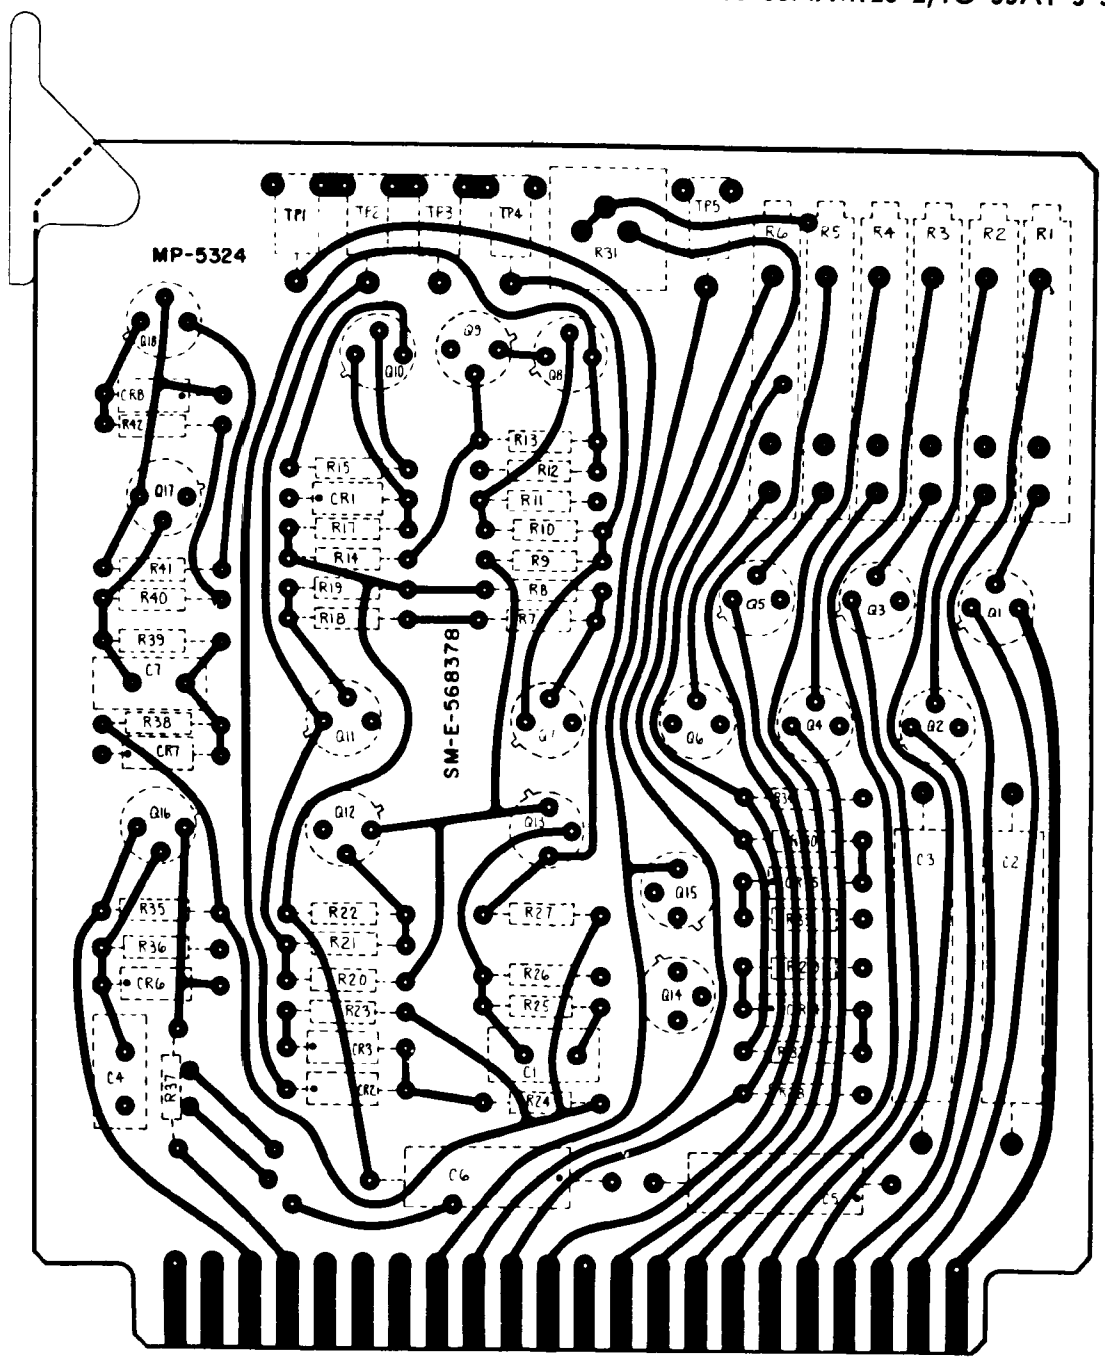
Encoder module A5, wiring diagram and parts location.
